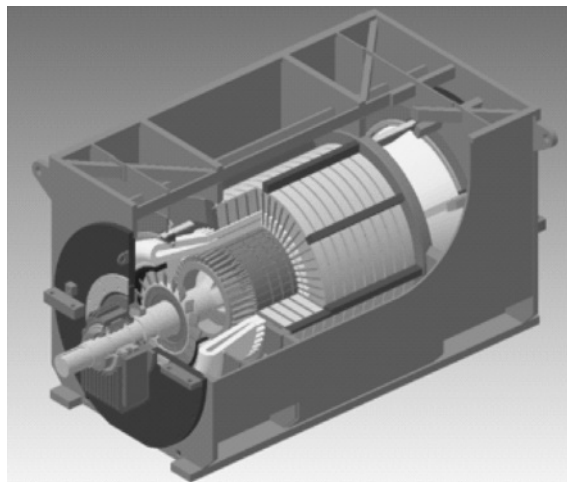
Sectional view of frame, stator, and rotor. Reproduced with permission of Parsons Peebles, Scotland.
